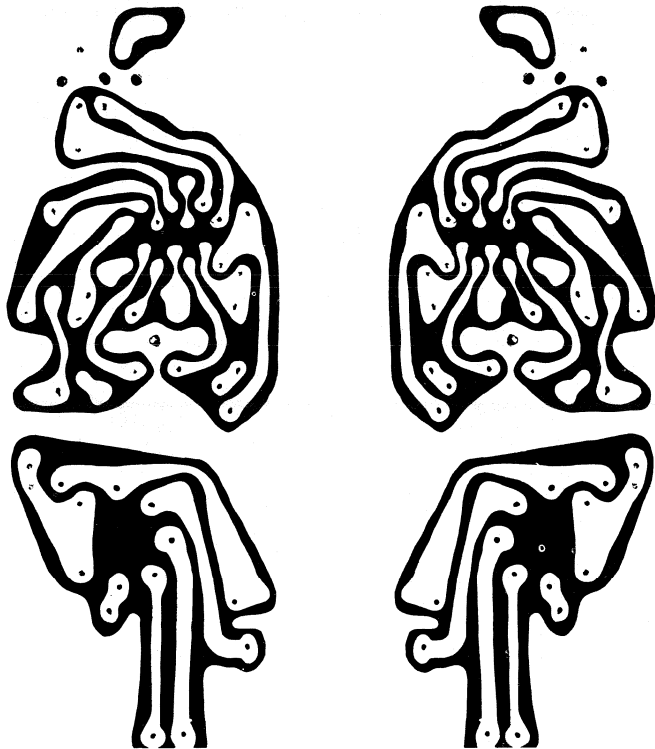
Recommended layout of printed-circuit board for complete TV-receiver sound strip utilizing RCA-CA3041 (Top View).
